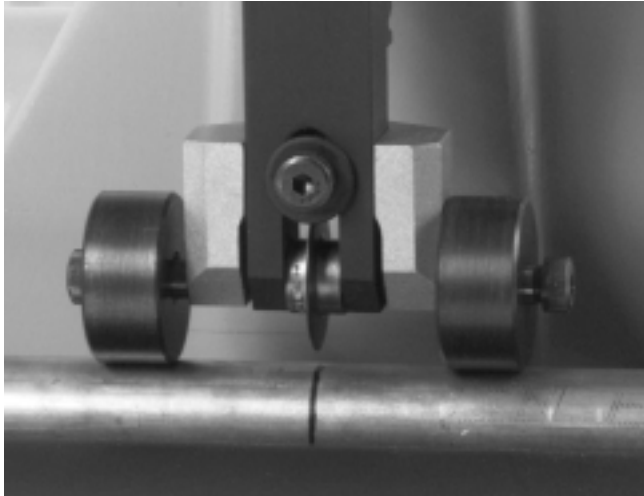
Cutter Wheel Support Rollers Contacting Tubing
